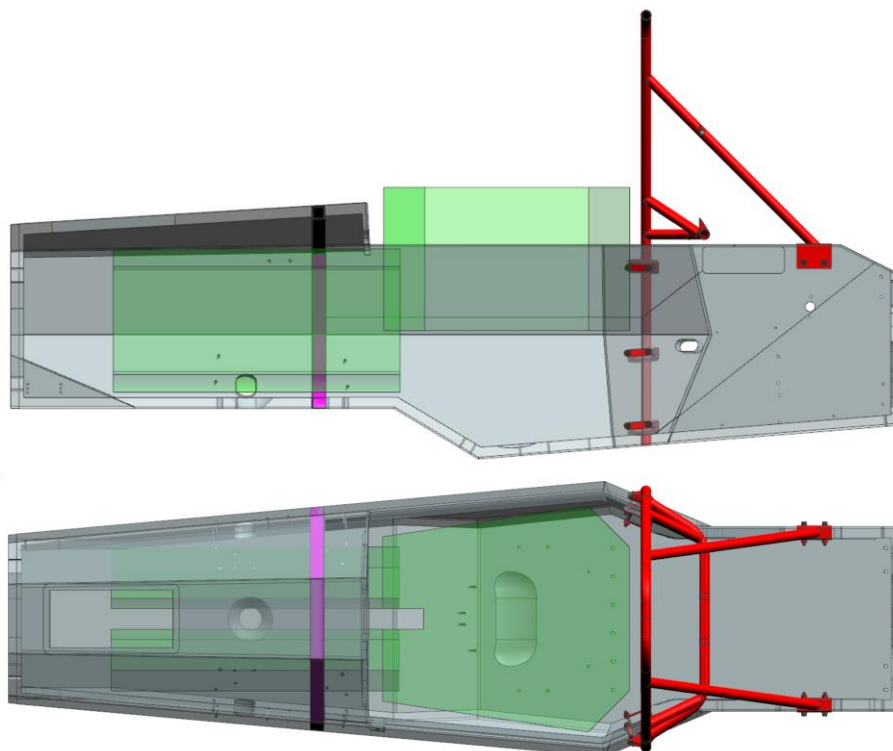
Side view (top) and overhead view (bottom) showing cockpit template clearance.
